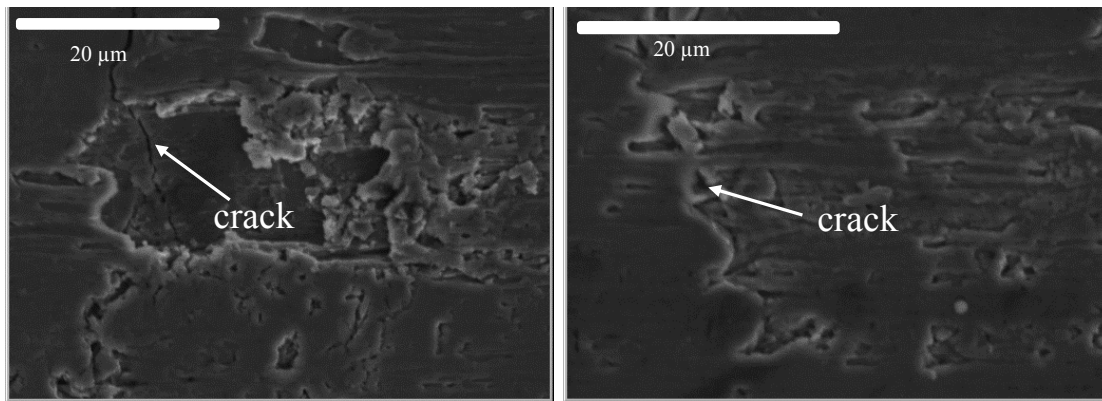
SEM image showing the fracture and crack initiation on the machined part
